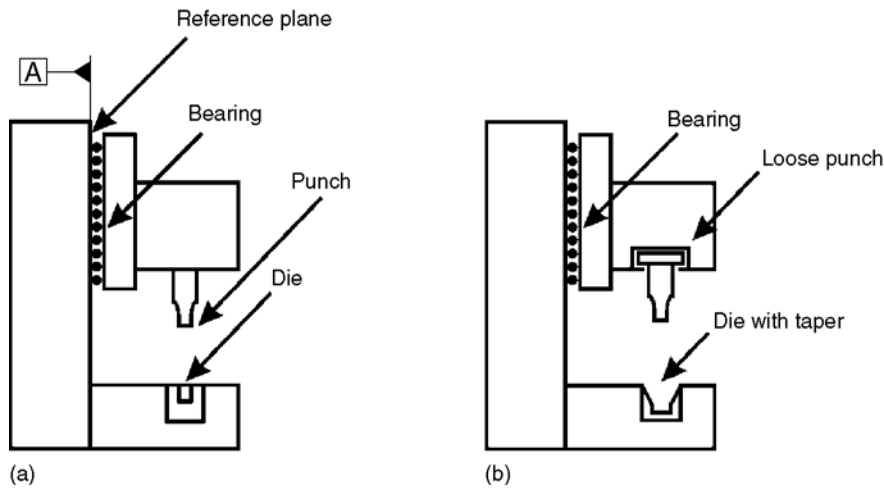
(a) Example of a bulk forming set-up where the back-plate is used as a reference for the tooling elements. (b) A die with a tapered inlet and a flexible punch fixture is used to form a self-aligning bulk forming tool.
